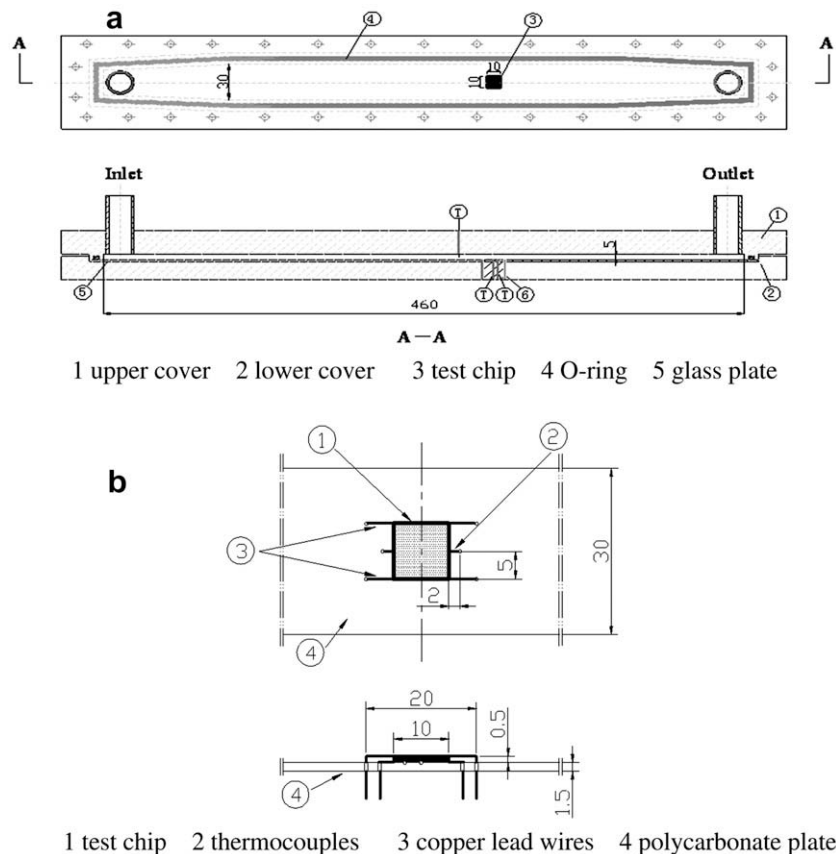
Schematic diagram of test section and heater assembly. (a) Test section. (b) Details of heater assembly.
